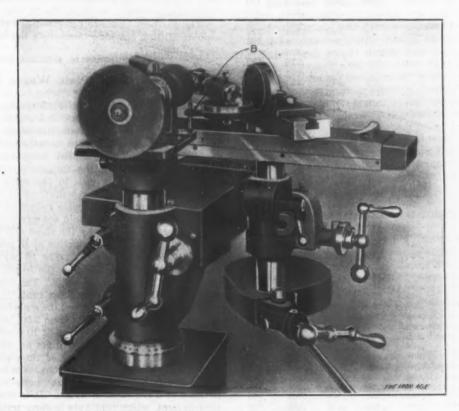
Showing Tooth Rest Supported from the Grinder Table.
